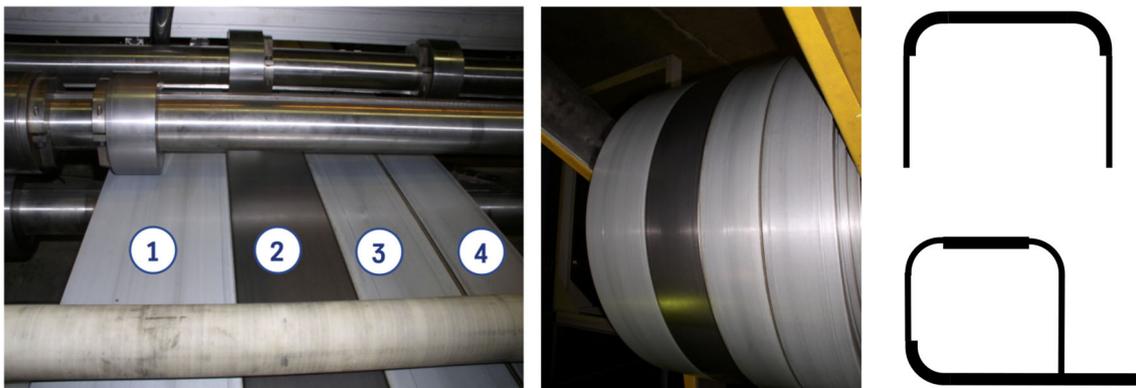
Example of tailor-welded coil consisting of 4 slit coils and examples of possible multi-gage profiles by roll forming
